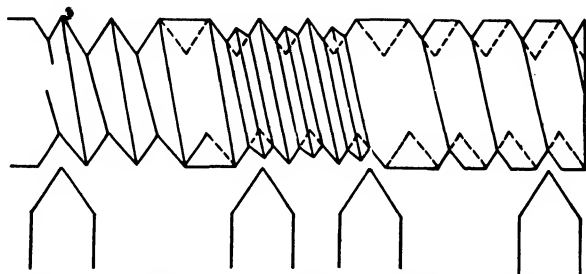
Cutting threads rapidly by splitting the cuts.
